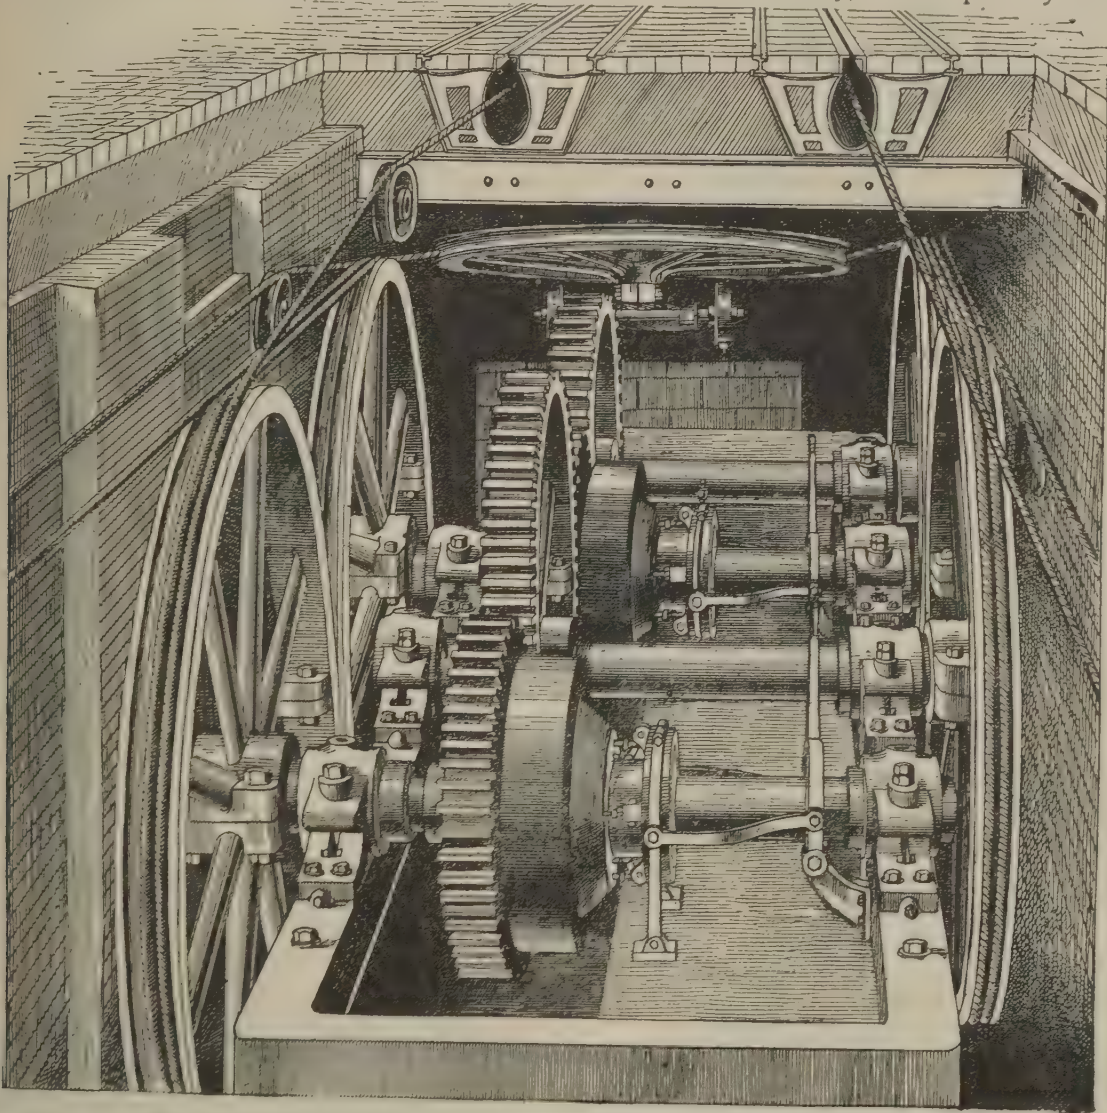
PIT MACHINERY FOR DRIVING AUXILIARY CABLE—CLEVELAND CITY CABLE RAILWAY.
